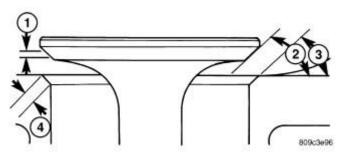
Valve Face and Seat Courtesy of CHRYSLER LLC
